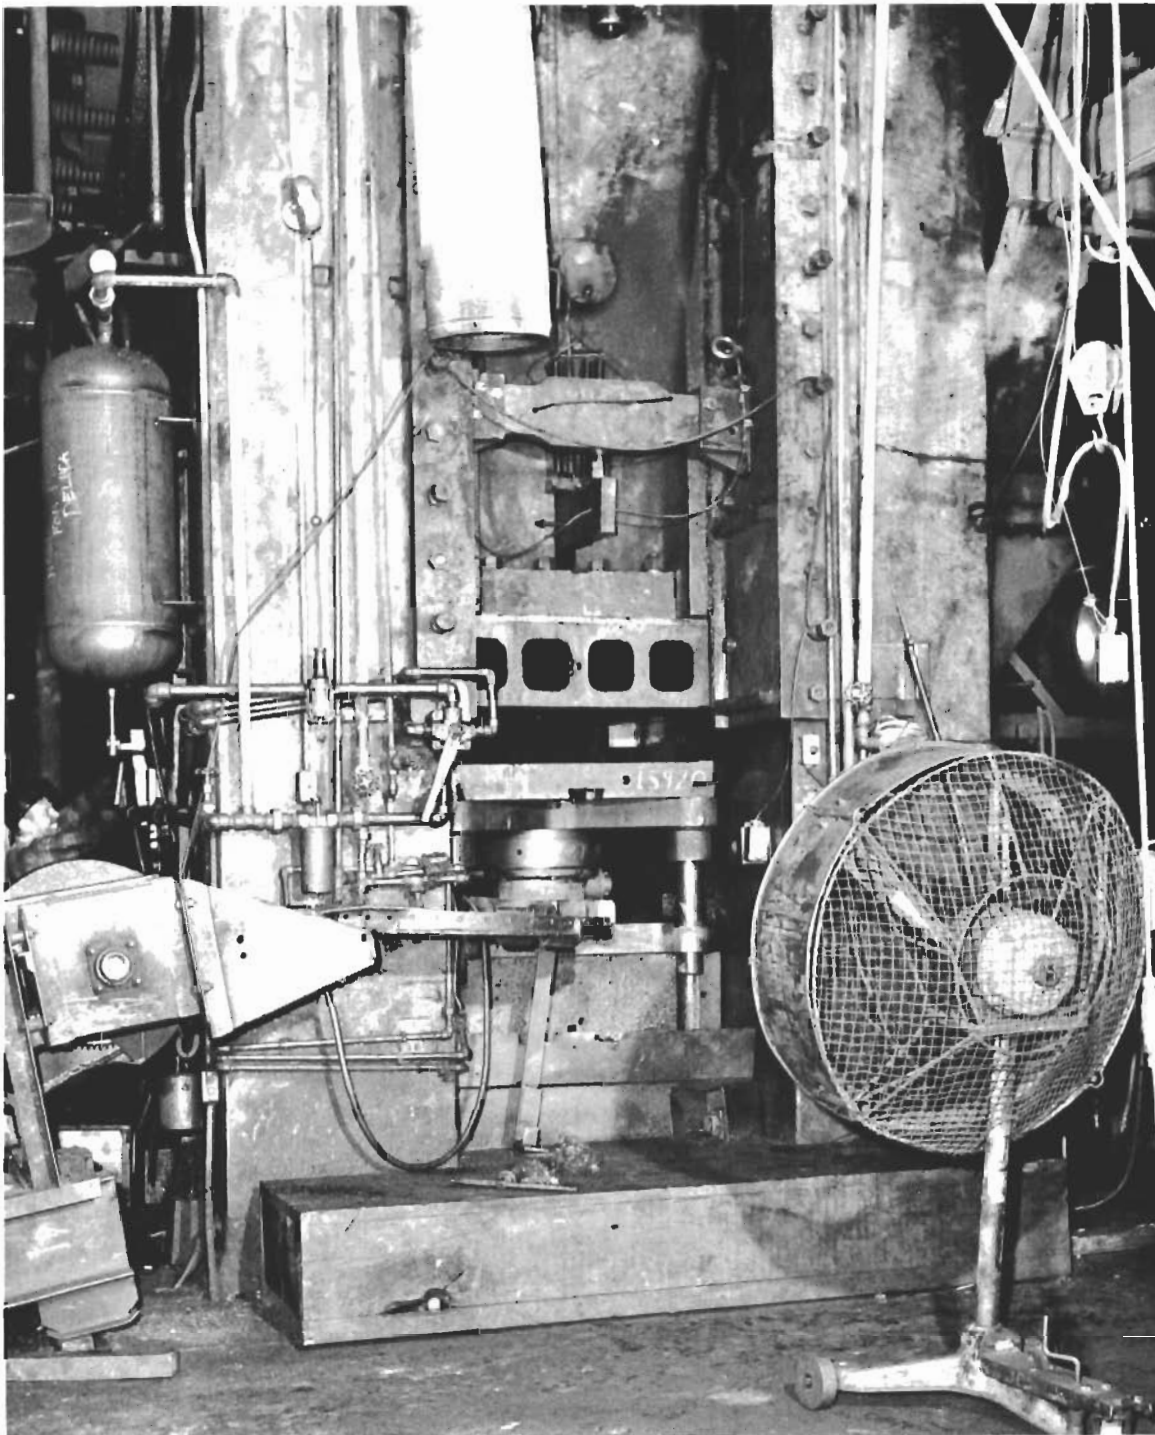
Mechanical Forging Press Rated at 4000 Tons of Force and Employed by Ladish Co. to Produce Fin Rib Forgings. Dies Shown Partially Installed are Not Pertinent to Program. Conveyor at Left of Press Brings Heated Workpieces to Press Operator from Exit End of Gas-Fired, Pusher Type Furnace (Not Shown).
